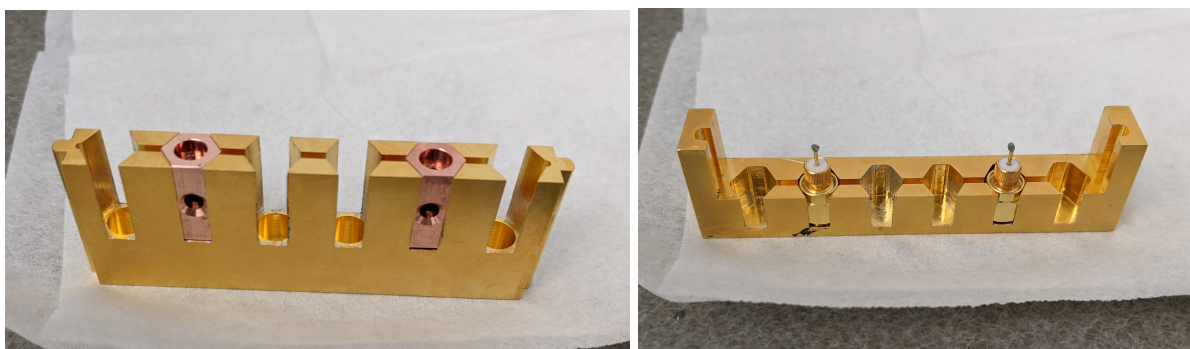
a (left): Enclosures correctly inserted into hex jig. b (right): SMA connectors prepared for pressing with cap and solder paste.
